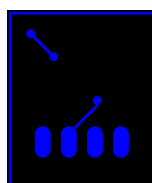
MP34DT01 board bottom layer designed using EAGLE
